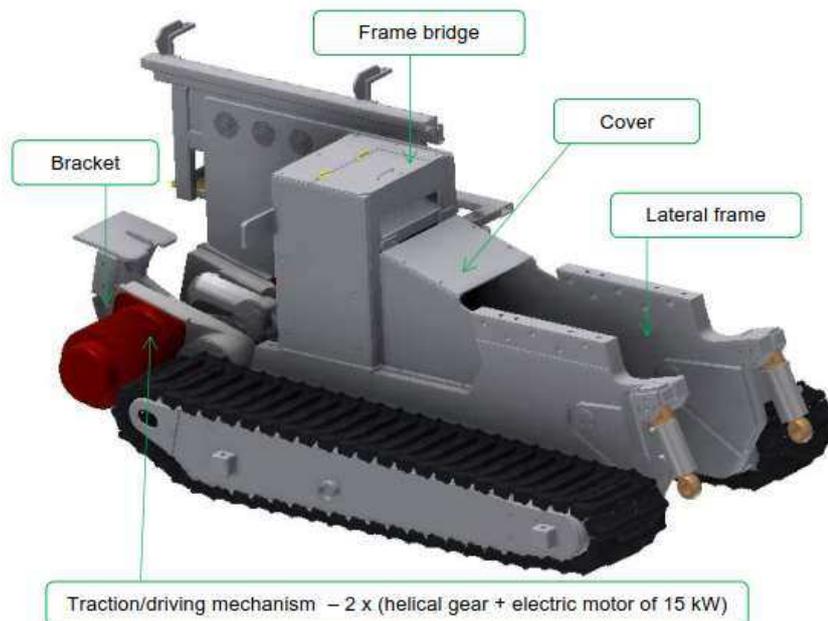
Frame with driving/traction and crawler tensioning mechanism
